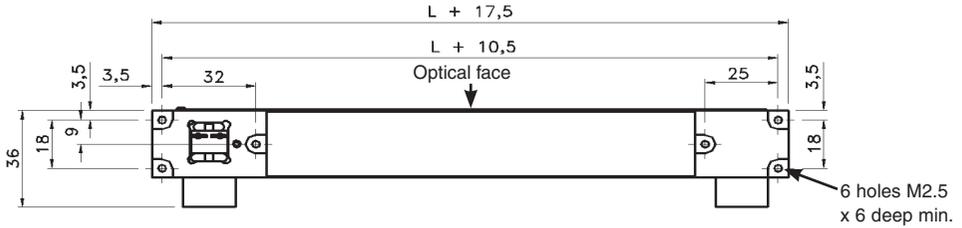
fixing holes for mirror of total length L ($L < 350$ mm): all dimensions in mm
